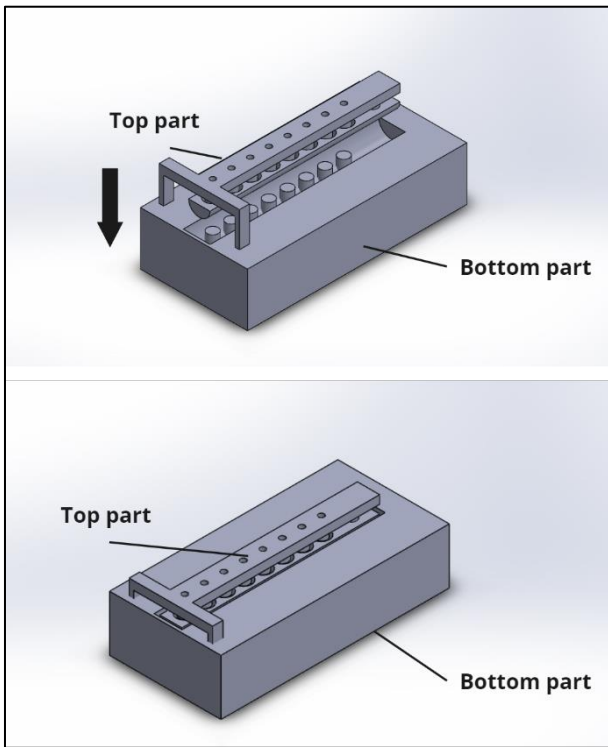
Illustration of a single mould consisting of a top and bottom part to manufacture the ProSTATIC without assembly. The top part is clicked on top of the bottom part.
